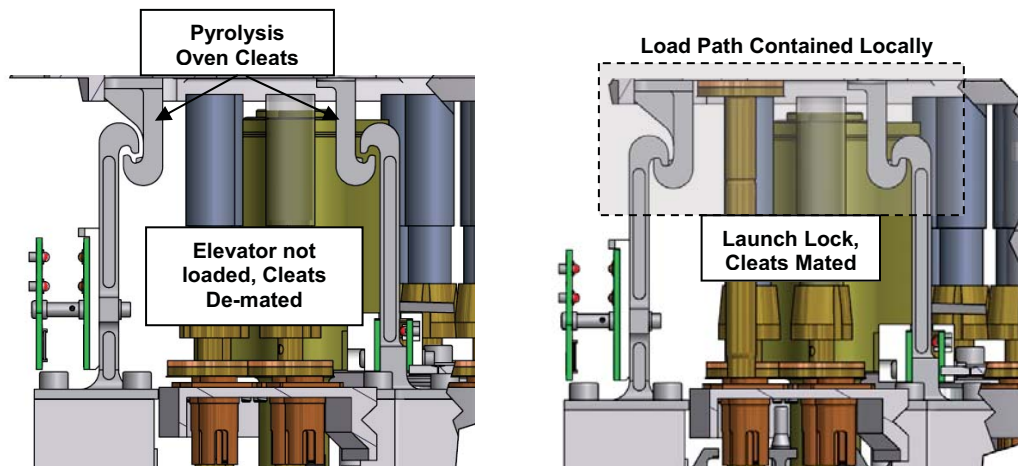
Rotating Elevator Frame Launch/Seal Lock
